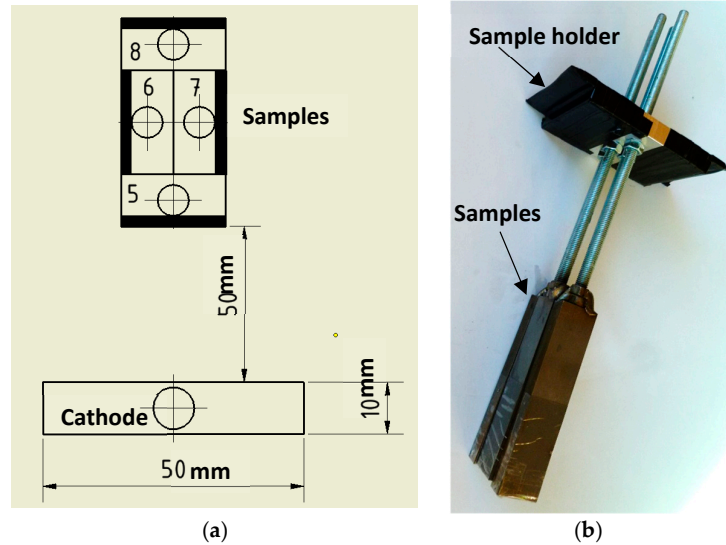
HVOF coating removal using single cathode: (a) sample assembly schematic; (b) assembled samples for shape simulation.
